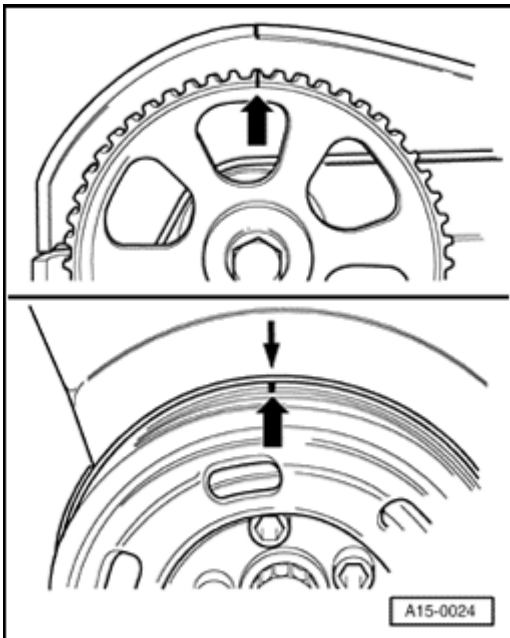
Setting Crankshaft To Markings For TDC Of No. 1 Cylinder
